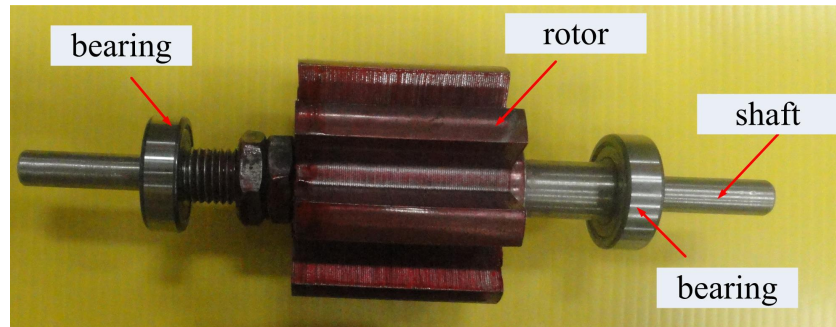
Rotor and shaft supported with bearings on both sides for test rig I.
